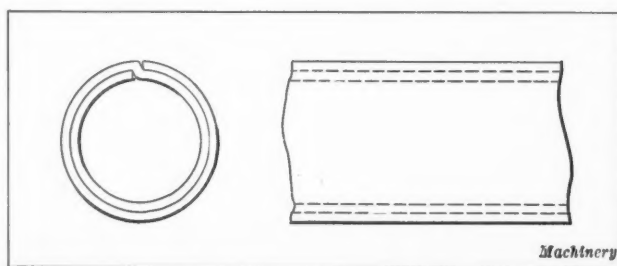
Enlarged Drawing showing the Construction of the Tubing
